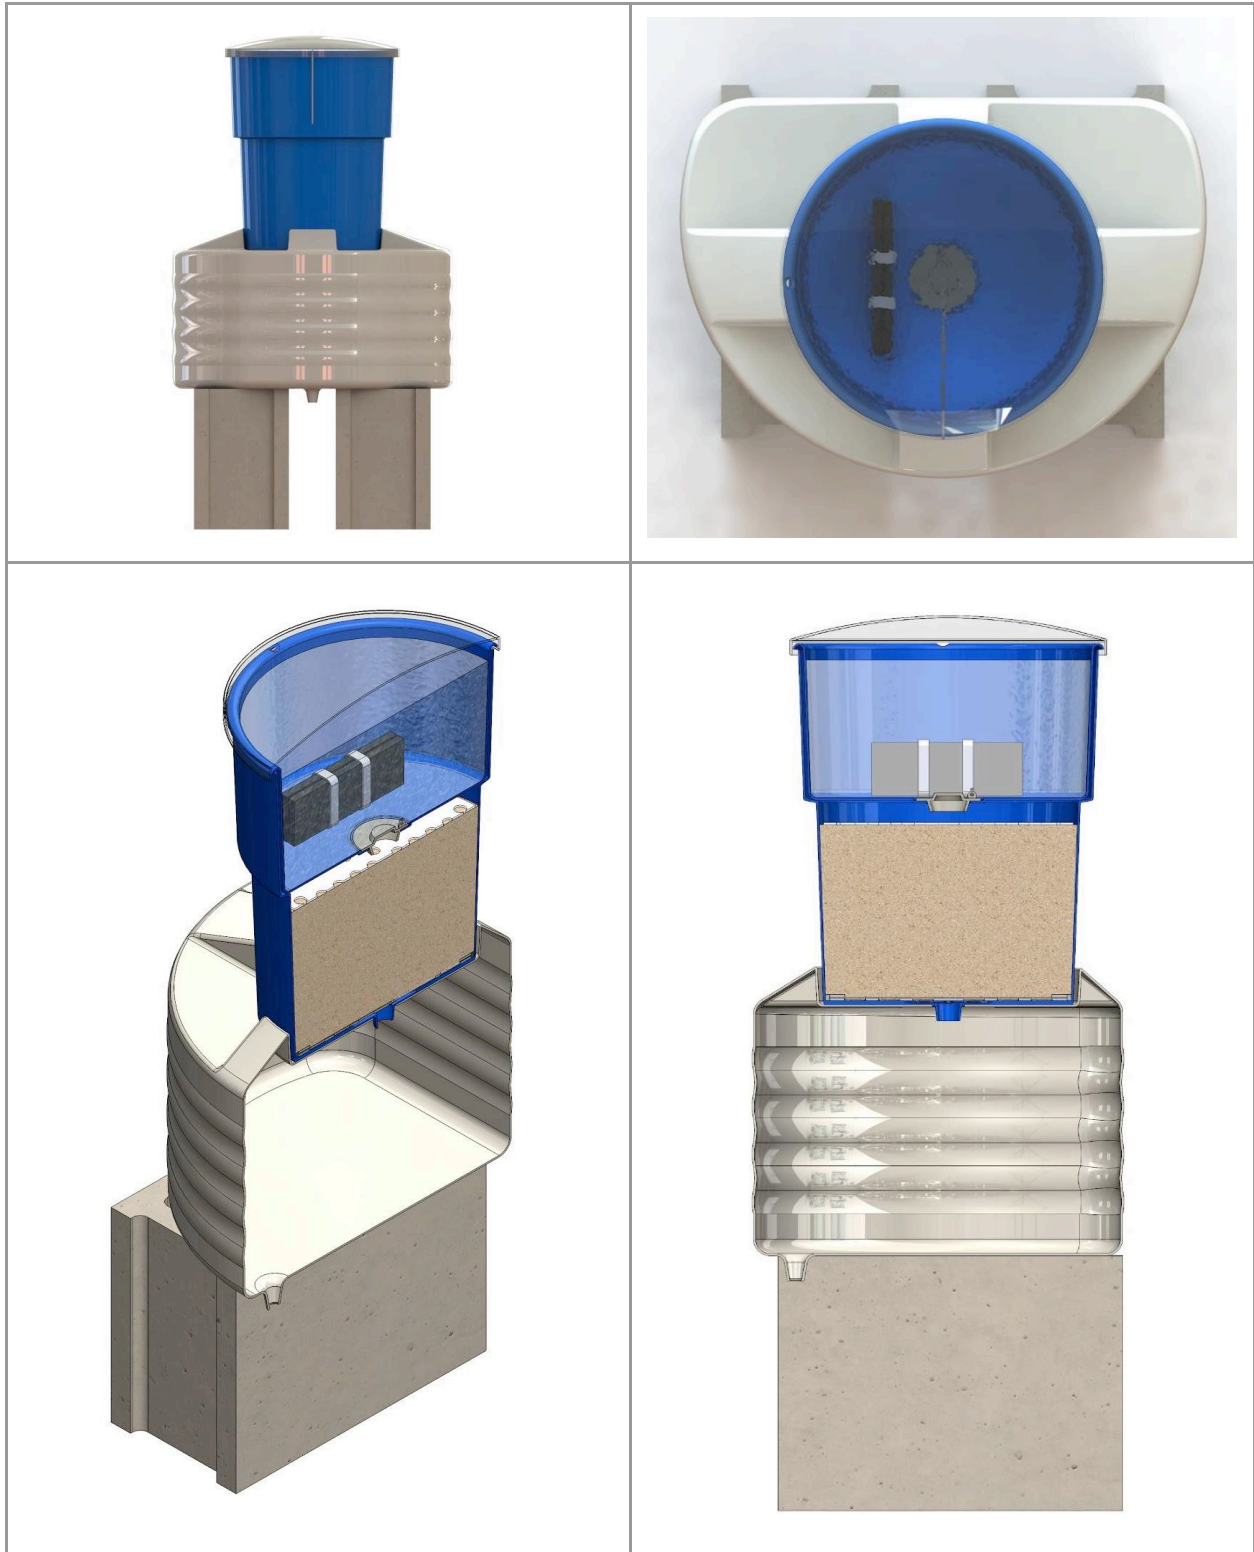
Detailed view of our device (Clockwise from top right): Front view, top down view, isometric cutaway view, and side cutaway view.
